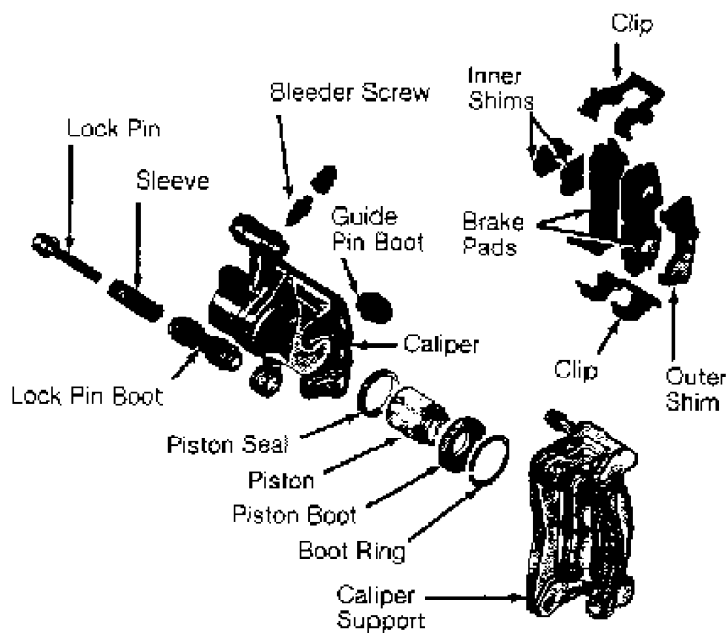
View Of Rear Disc Brake Caliper Assembly (Diamante, Stealth & 3000GT)
